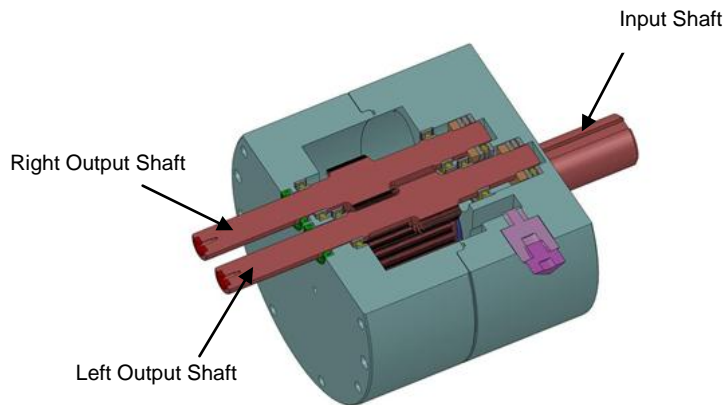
CAD model of the designed splitter gearbox (CFAM Technologies (Pty) Ltd, 2011).
